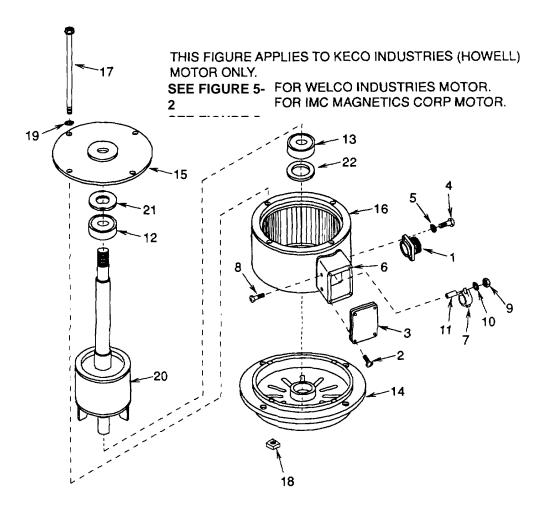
Evaporator and Condenser Fan Motor (Keco Industries (Howell) Motor).
